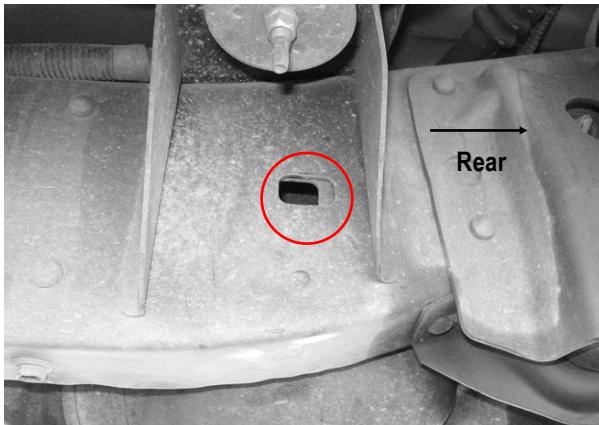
Driver Front Mounting Bracket (DFM) Installation
